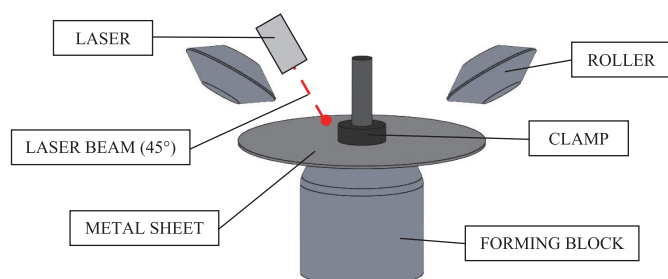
Schematic configuration of rotary forming process with a local laser heating
